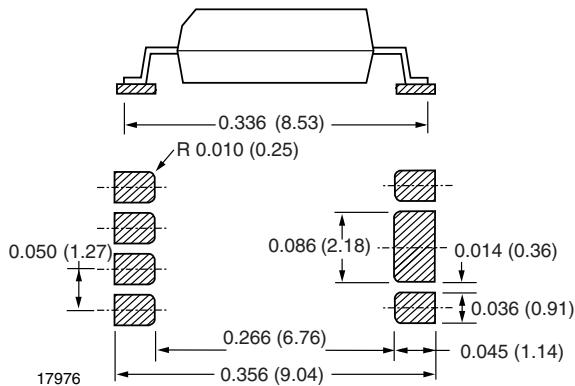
8 Pin PCMCIA, Heat Sink
